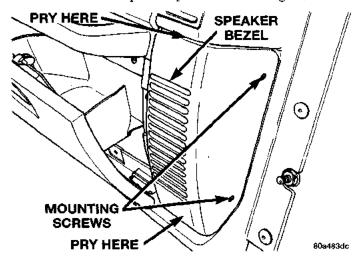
Instrument Panel Speaker Bezel Remove/ Install
